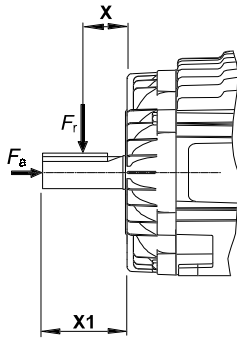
Main spindle motor 2AD280A/B - permissible shaft loading
